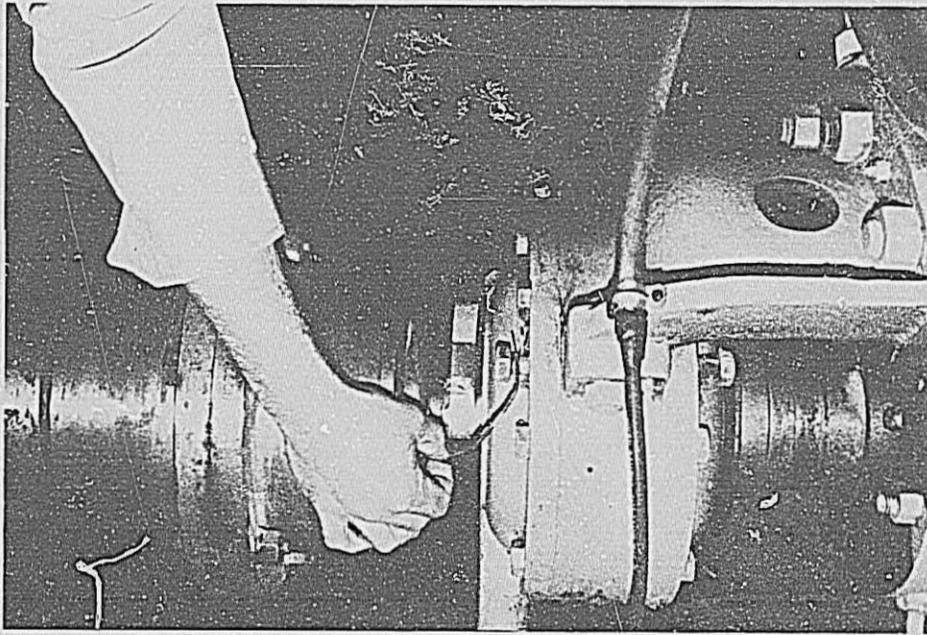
Strain gages being placed on the pump shaft for obtaining torque measurements.
